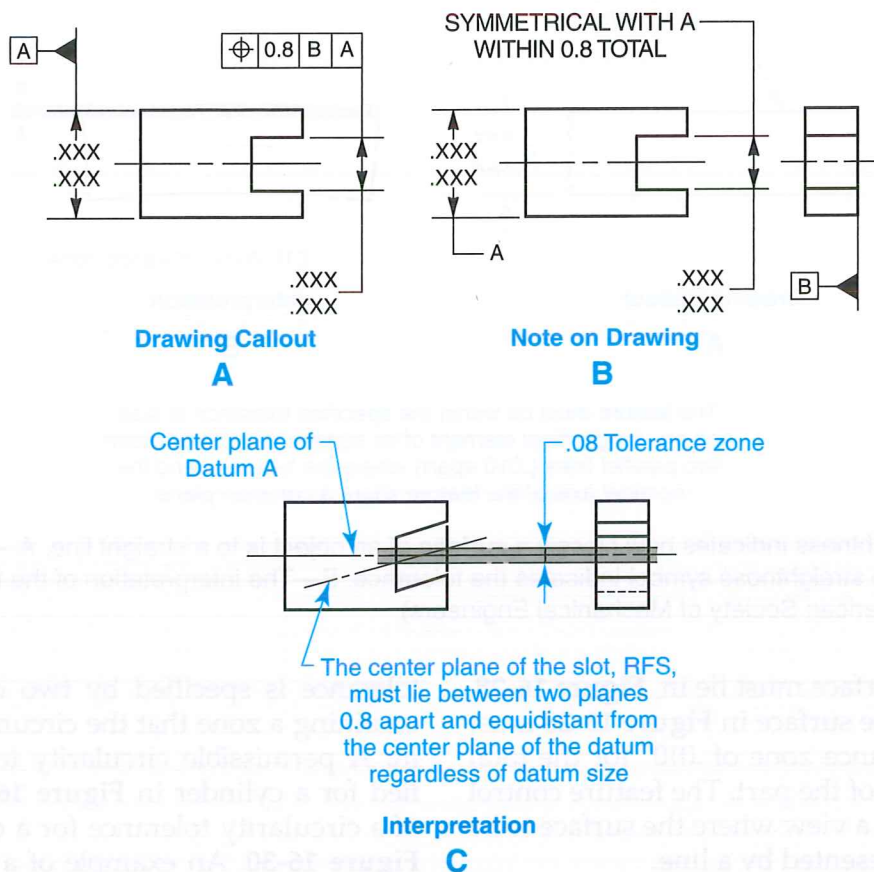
Symmetry indicates how closely one side of a feature matches the other side of the feature (about a centerline or a center plane). A—The symmetry may be specified using a positional tolerance. B—A note on the drawing used to indicate symmetry. The note illustrates the meaning of the drawing callout in A. C—The interpretation of the tolerance for the given example. (American Society of Mechanical Engineers)
